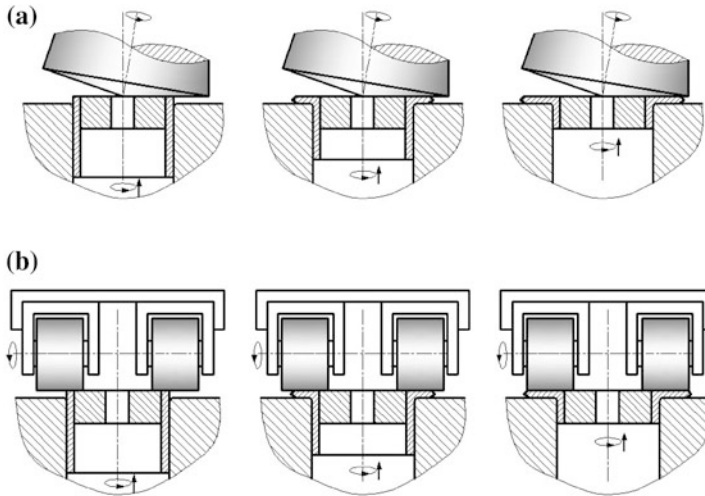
Schemes of the axial rotary forging of flanges by conical (a) and cylindrical rolls (b)
